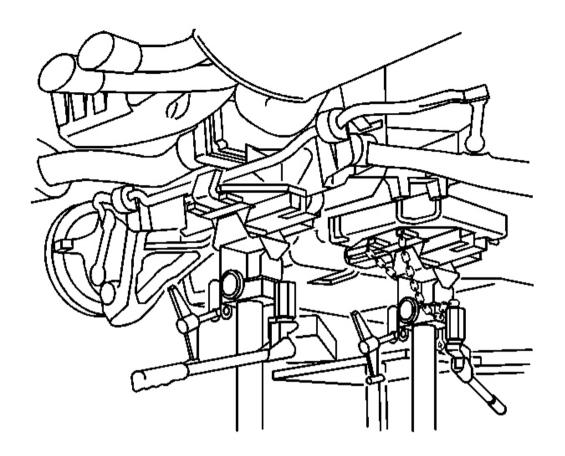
View Of Jack Under Front End Courtesy of GENERAL MOTORS CORP.
